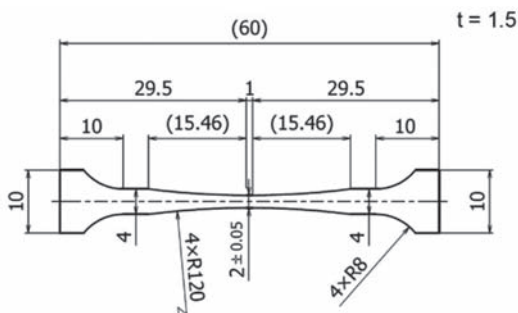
Fatigue test specimen geometry (dimensions in mm)
